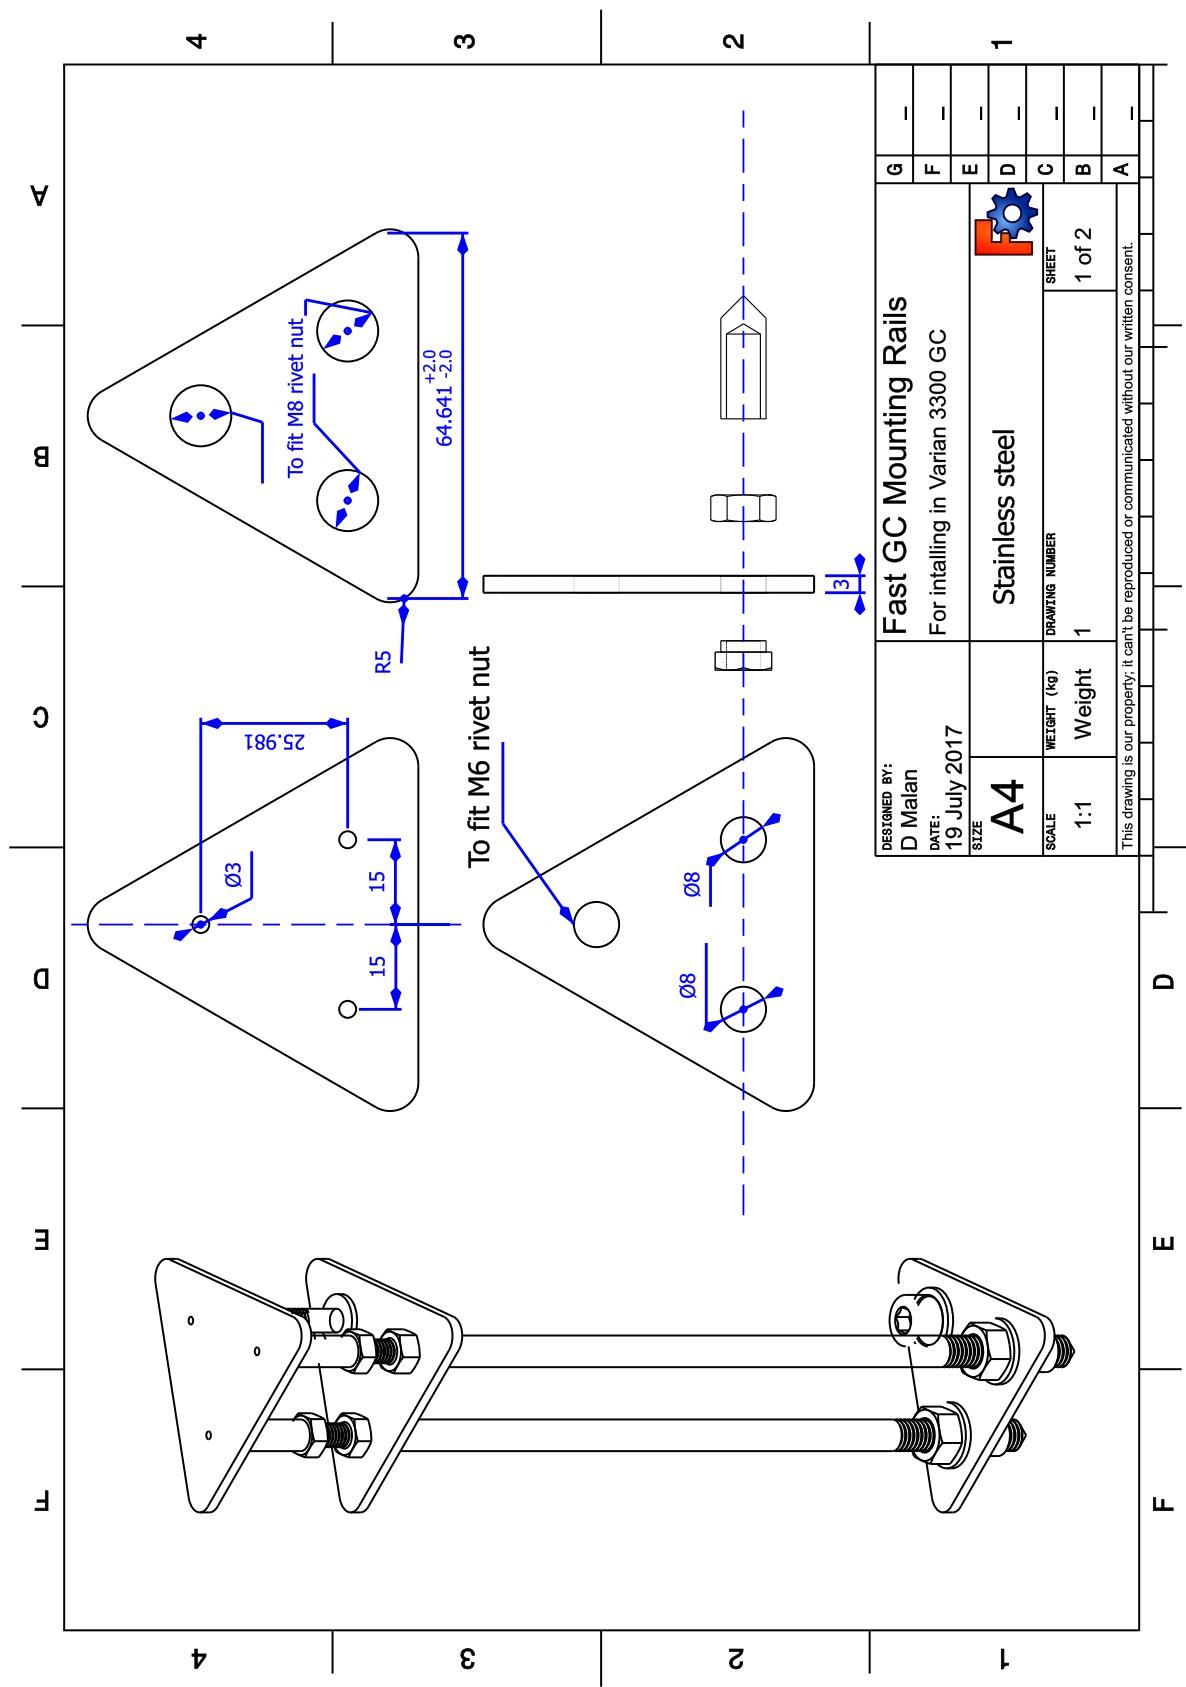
A technical drawing of the rails carrying the T-piece mounting block.
